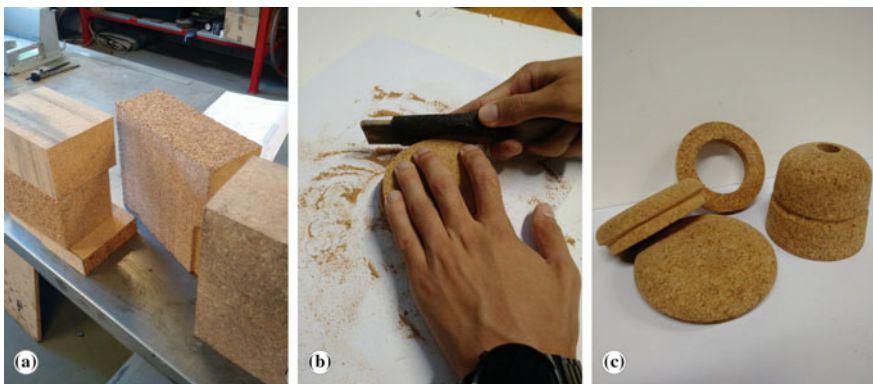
a Cutting of cork blocks b Sanding of parts to improve finishing c Cork parts obtained
